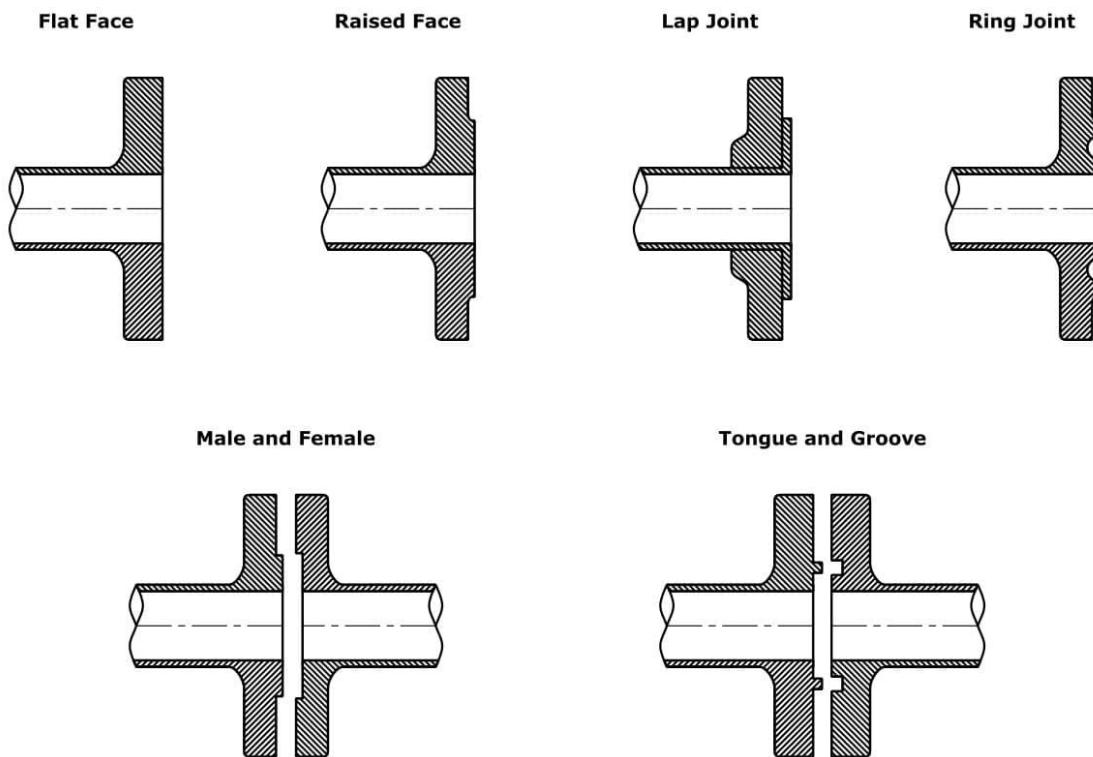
Typical flanges face: Flat face (FF), raised face (RF), Lap joint (LJ), ring joint (RTJ), male and female (M&F) and tongue and groove (T&G) Image reprinted with permission from saVRee ltd. Original image: [Flange Faces Explained \(Flat, Raised, etc\) - saVRee](#) [45].
